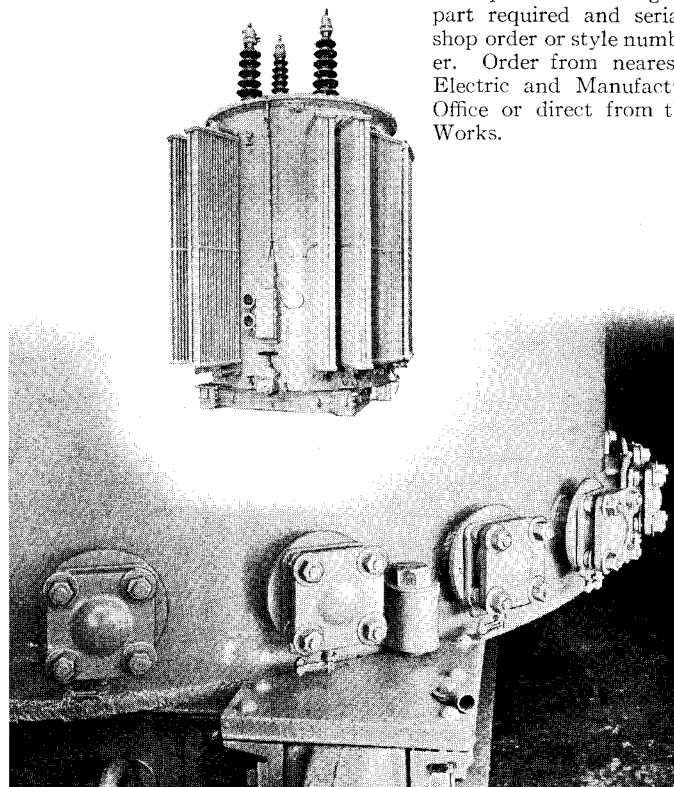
TRANSFORMER TANK WITH BLIND FLANGE BOLTED OVER VALVE. IN INSERT, TRANSFORMER WITH RADIATORS IN PLACE.
